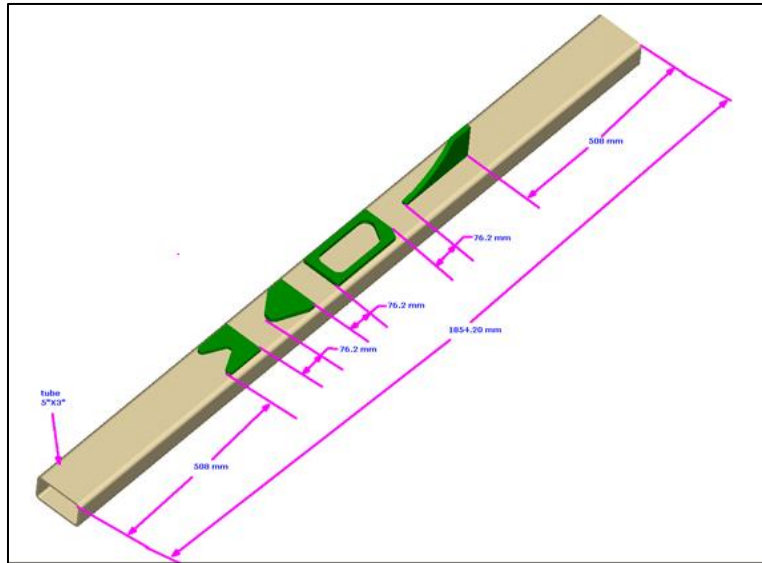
Geometrical details of the welded specimen – beam weldment
